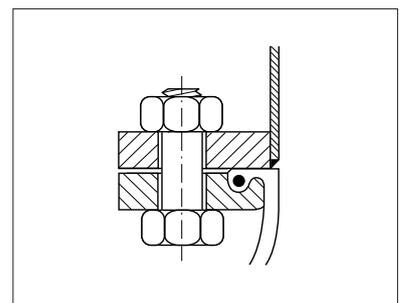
Sharp edge pipe ends will damage the rubber face.
